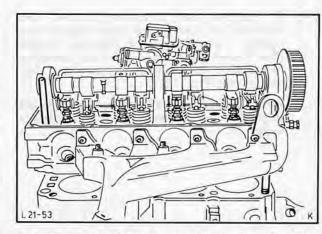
Fit cylinder head with aid of locating studs 21-003
